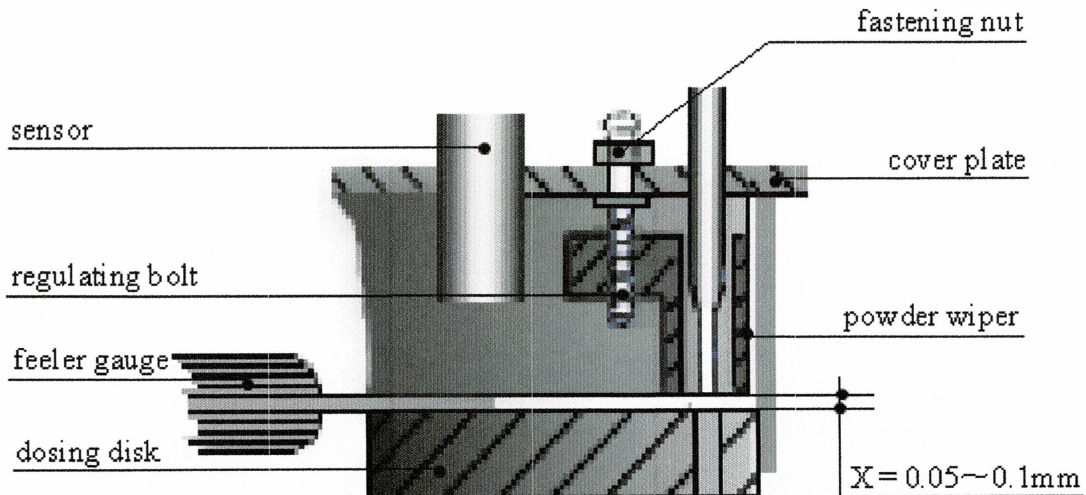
Clearance between Powder Wiper and Dosing Disk
